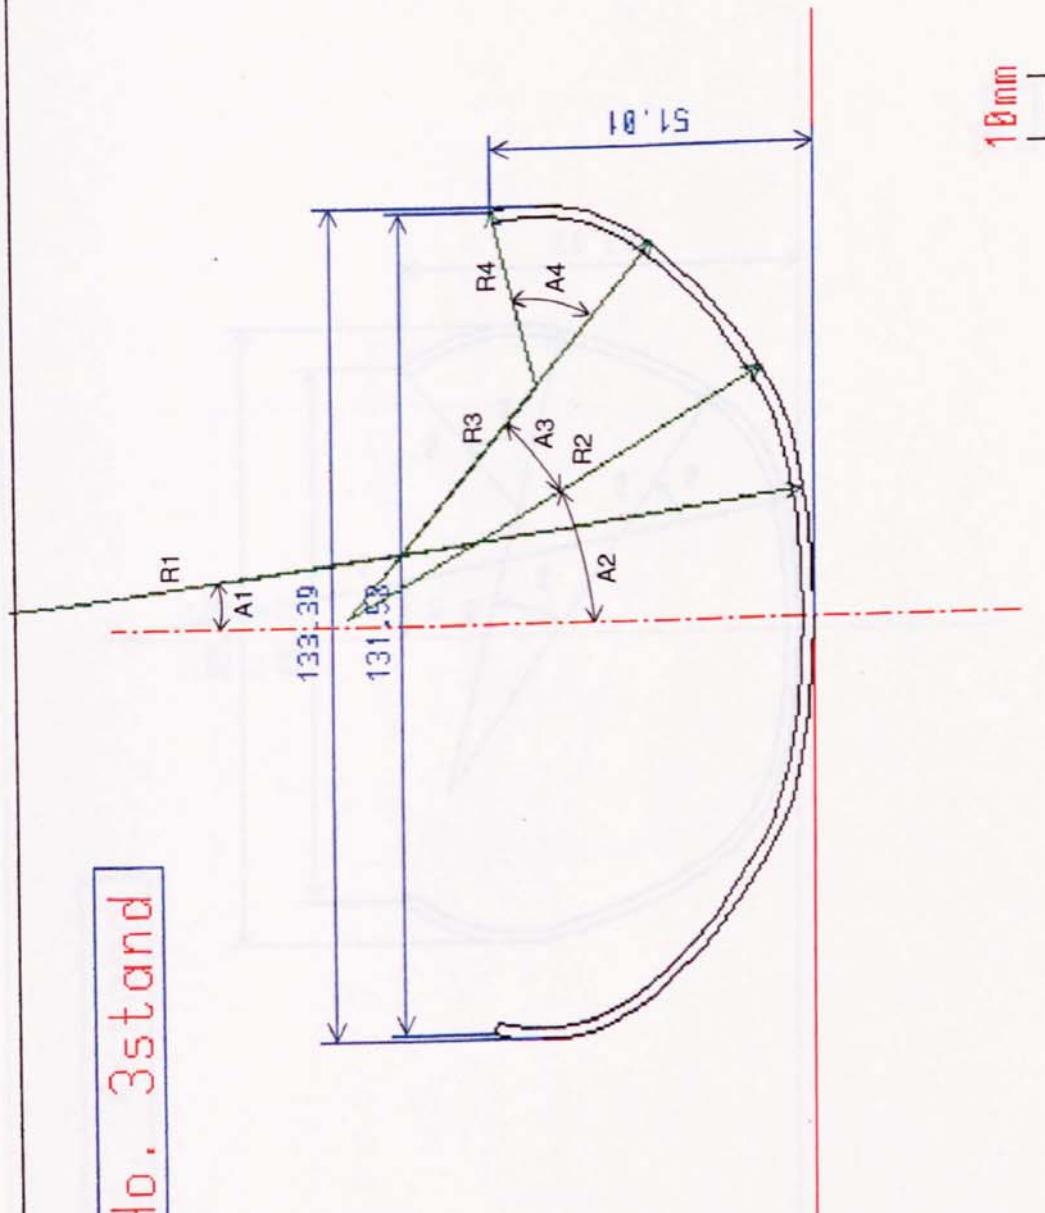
Drawing of planned forming flower at 2nd pass by flower pattern A using the CADFORM system
